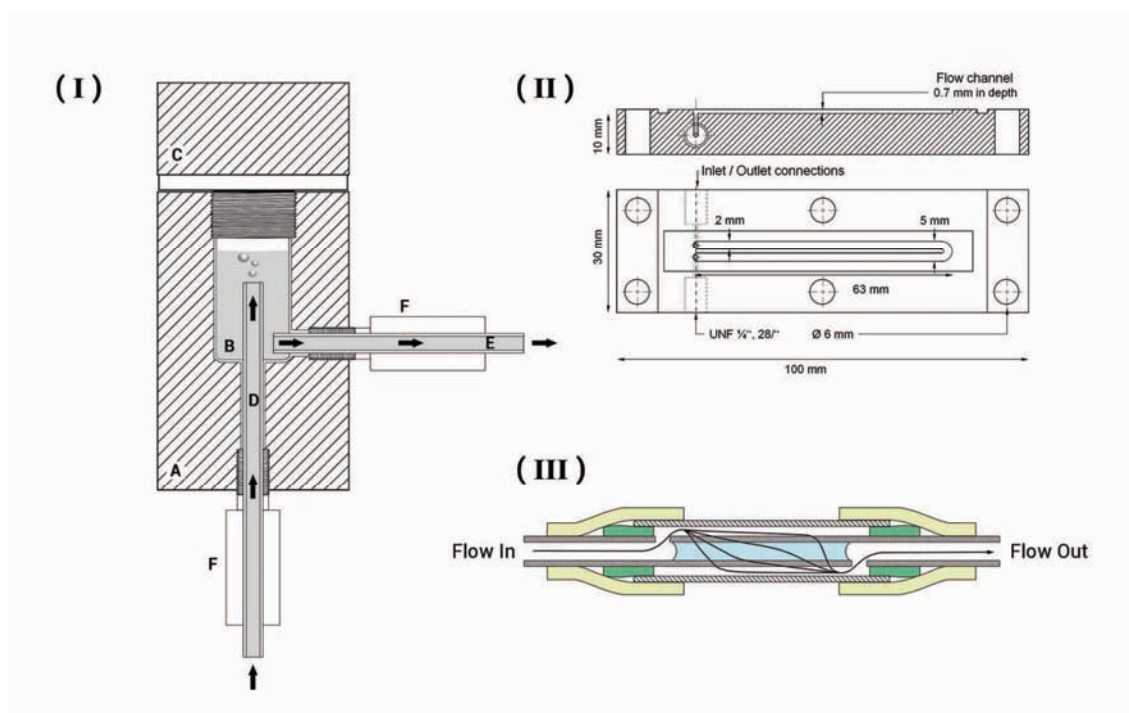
Detail drawings of manifold components. (I) Scheme of air bubble removing device (Sciware Systems SL), made of PMMA, includes indications of the liquids directions: A, PMMA piece; B, cylindrical cavity; C, screw cap; D inlet tube; E, outlet tube; and F, sealed screws. (II) Technical drawing of one of the two identical parts of the used gas diffusion cell (Sciware Systems SL), made of PMMA. (III) Scheme of conductometric flow cell (Sciware Systems SL) following design. Both (II) and (III) are described elsewhere [19]
